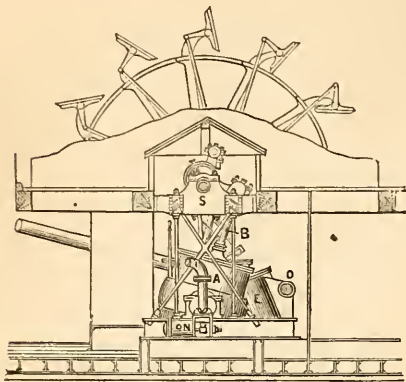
Oscillating Engine and feathering Paddle Wheel.
